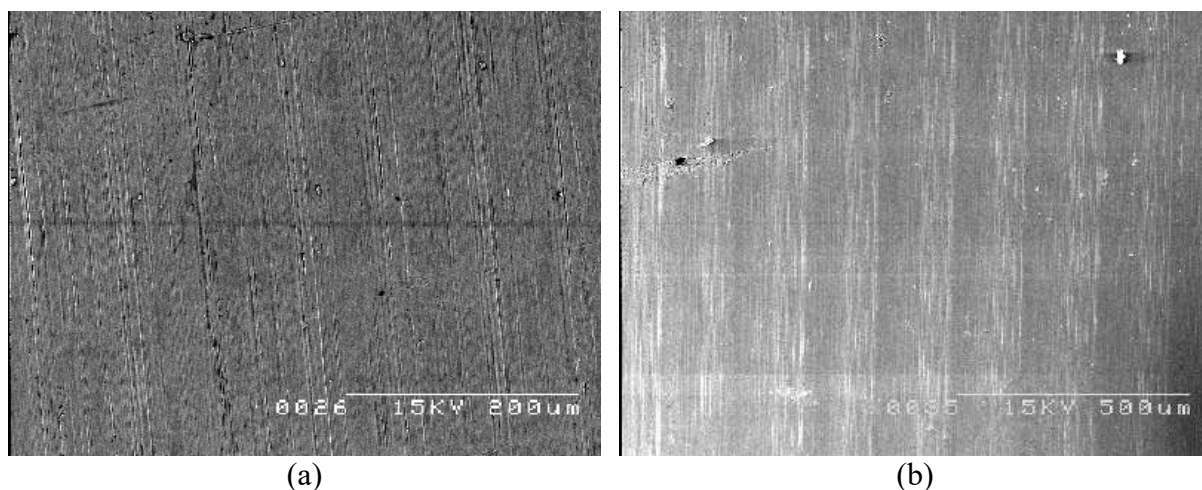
Surfaces generated after machining with coated carbide T3 tool with coolant pressures of (a) 11 MPa and (b) 20.3 MPa at a cutting speed of 110 m min^{-1} .
